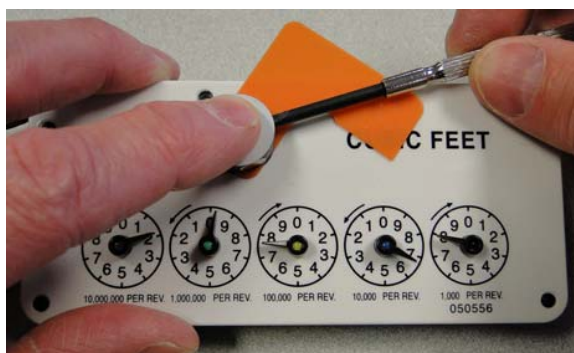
11. Tighten Pulse Wheel Screws to 1.2 ± 0.10 Inch-Pounds
